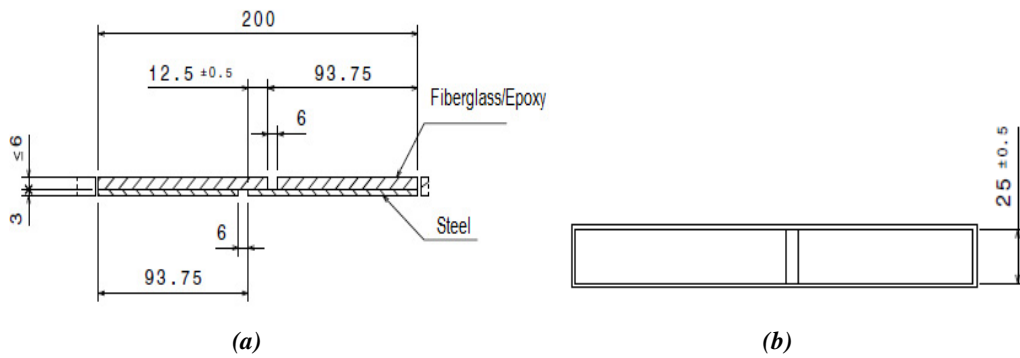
Test specimen geometry according to DIN EN 6060 (dimensions on mm): (a) Lateral view; (b) Front view
